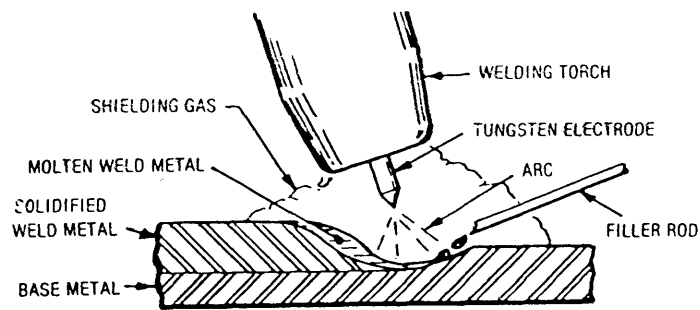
Illustration of Gas Tungsten Arc Weld Process Showing Parent Material, Electrode, and Shield Gas. Filler Wire May Be Added When Required (1)
